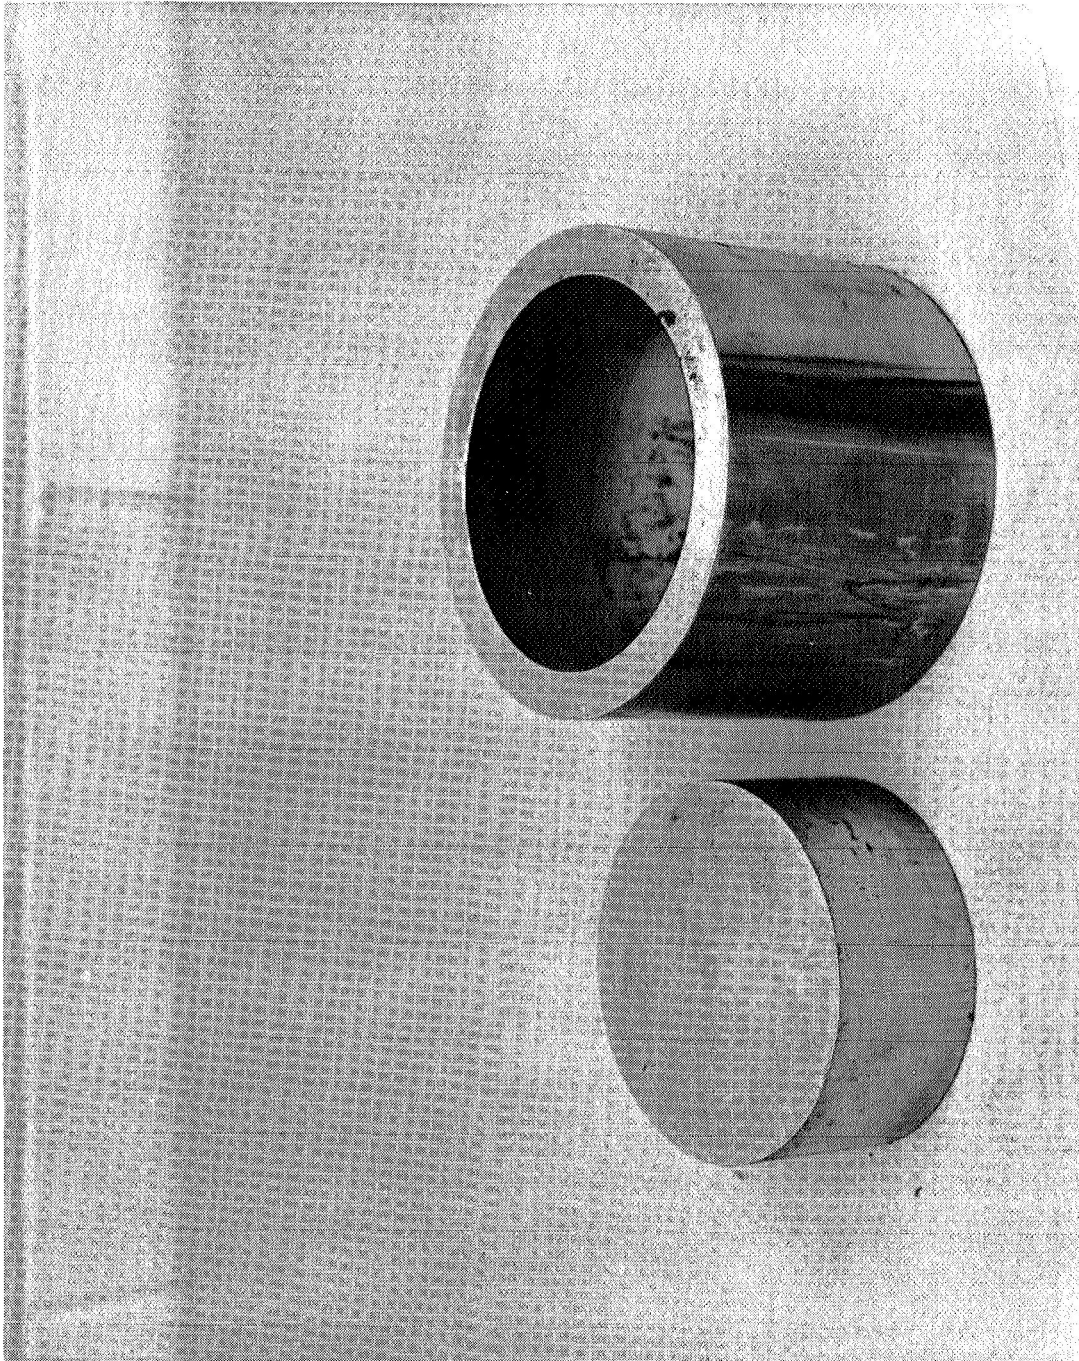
FIVE-INCH DIAMETER DISK COMPRESSION MOLD
